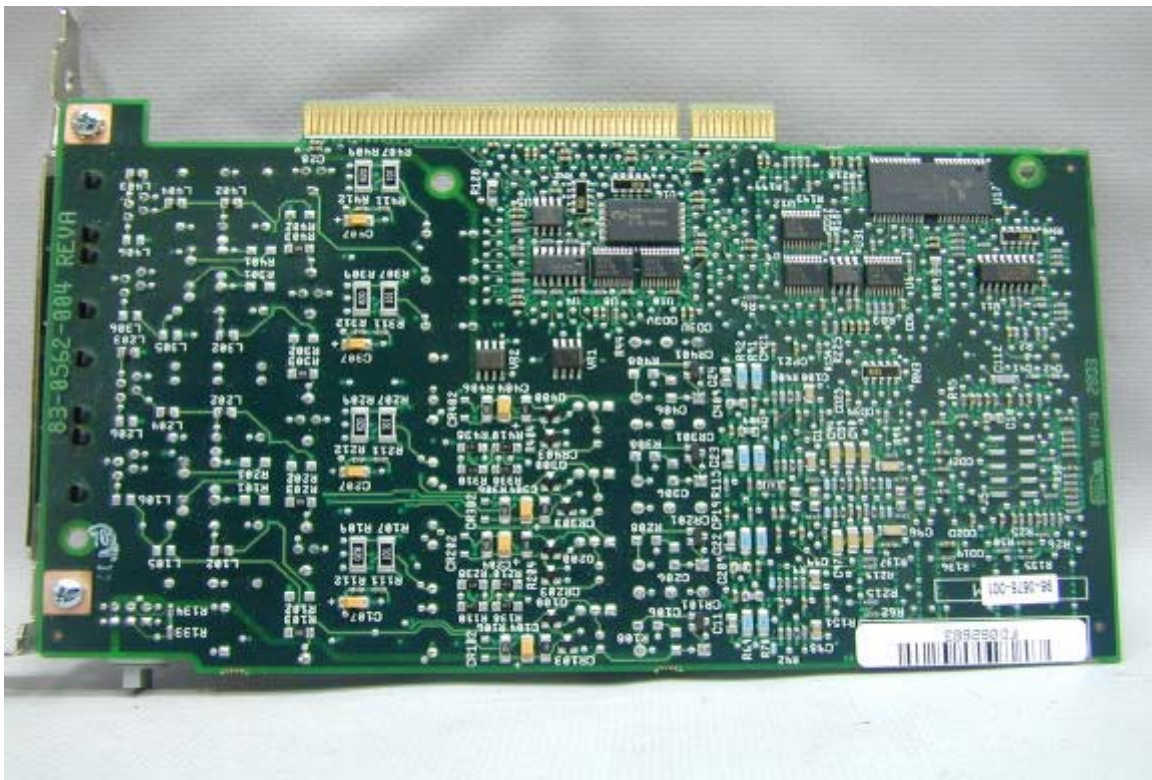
EUT I/O PORT VIEW (TELEPHONE CARD)
